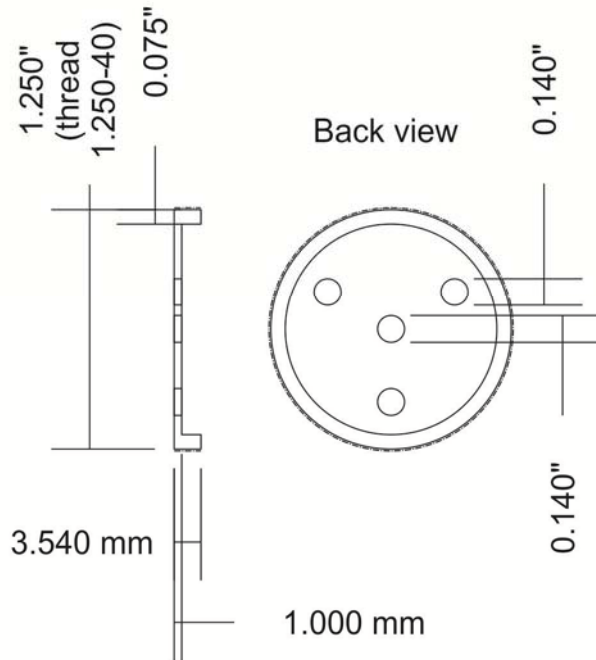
Adjustment plate of the ferrule positioning assembly. It serves two purposes. On the one hand, it provides the thread that the adjustment ring (Figure 8.7) threads on. On the other hand, it is screwed onto the aluminium block interface with the use of the guiding posts (Figure 8.4), and therefore exerting pressure on the O-ring that seals the ferrule.
